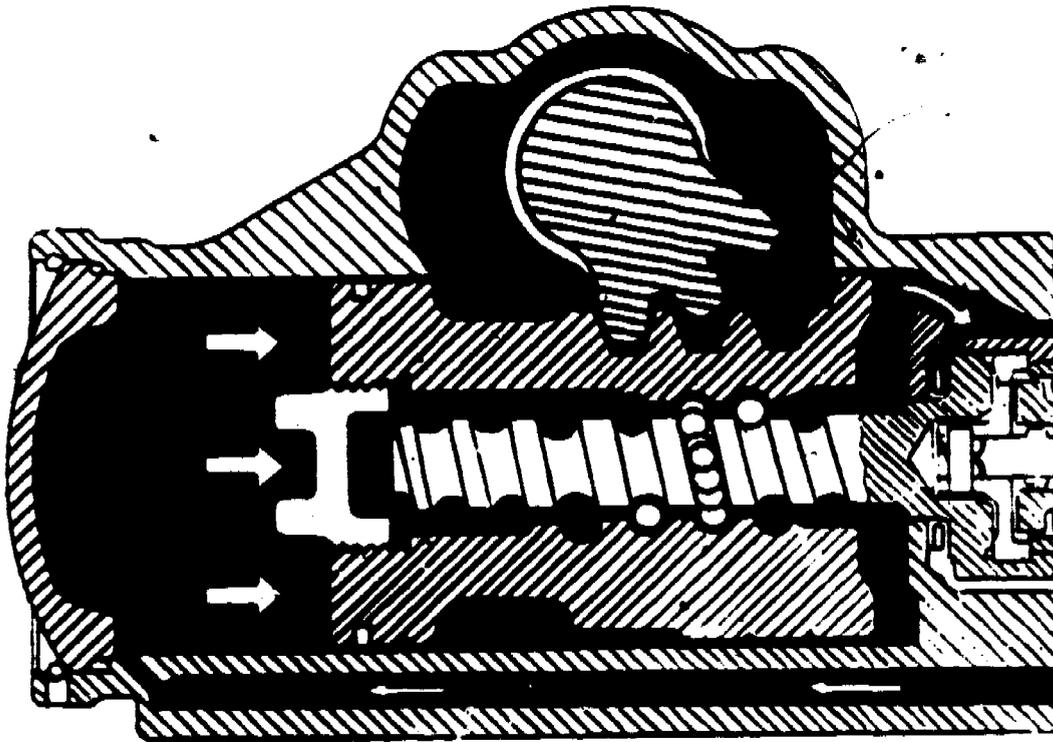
Steering Gear Oil Flow - Right Turn Position.
